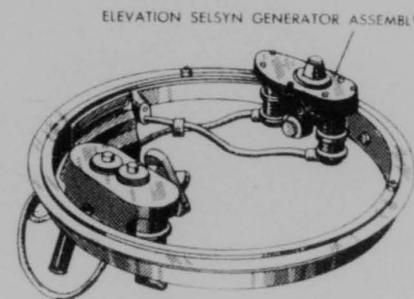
Elevation Selsyn Generator Assembly, Mounted on Inner Ring.
